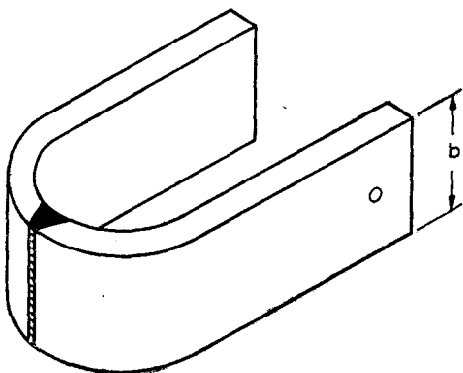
TRANSVERSE BEND TEST SPECIMEN AFTER BENDING
